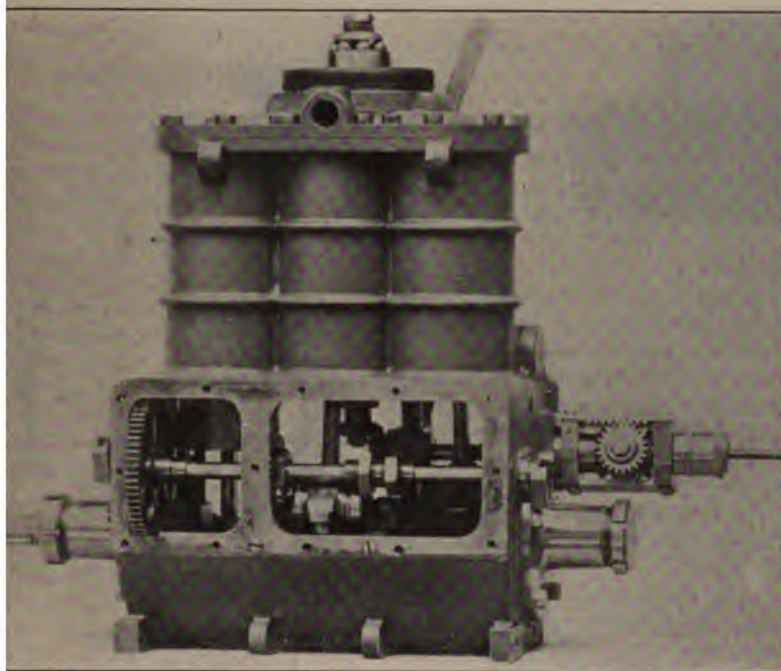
VOGEL THREE CYLINDER, SINGLE ACTING STEAM ENGINE.
